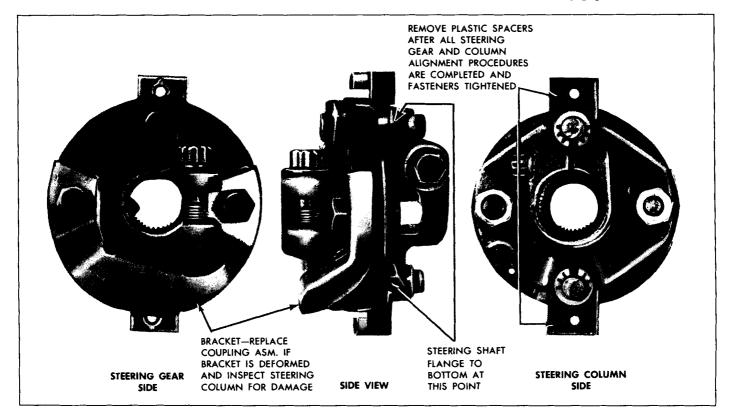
Installation of Steering Shaft to Flexible Coupling
